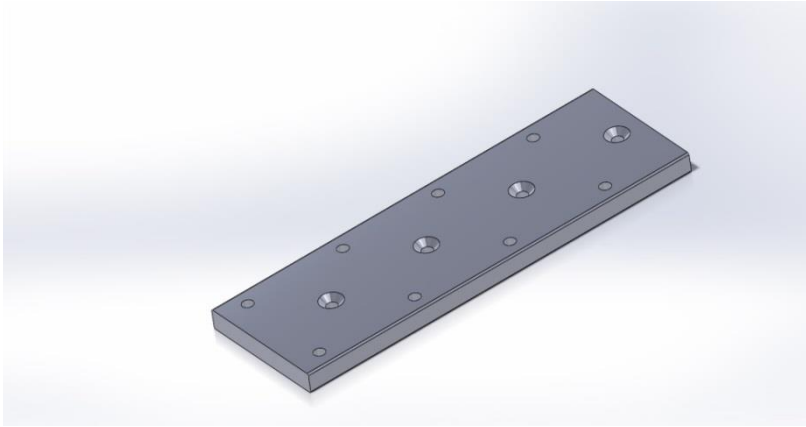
CAD of the magnets base plate (Isometric view)
